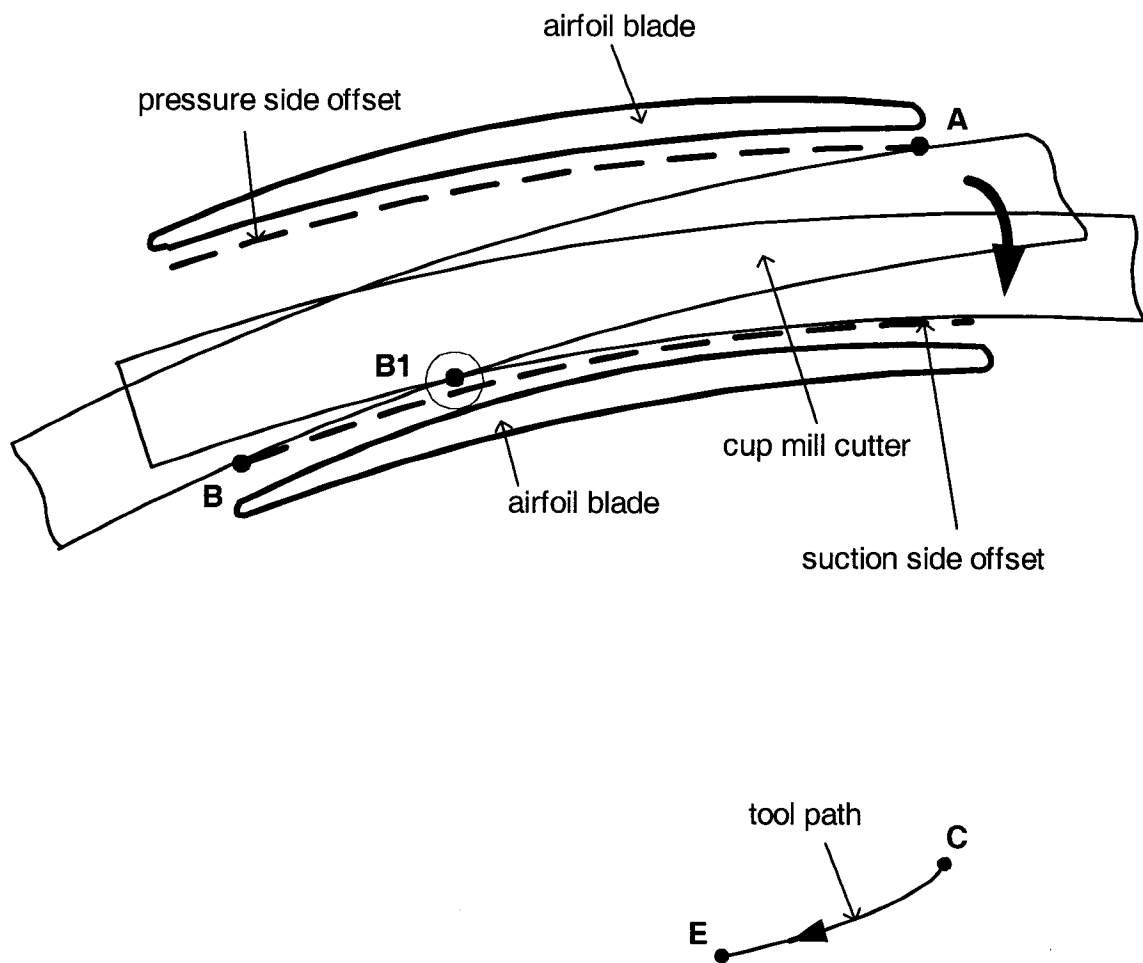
Tool movement in one axial level of machining – tool center rotation around point  $B_1$
